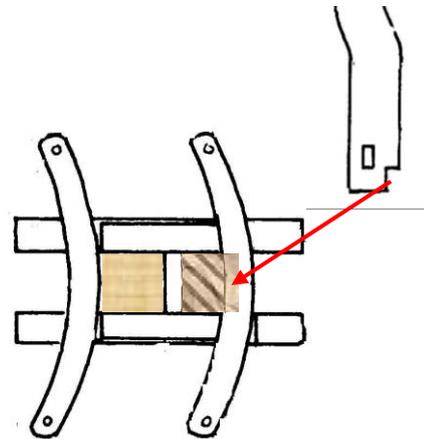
Main Topmast Crosstree Drawing – from Plan Sheet 6 - (showing curvature)
